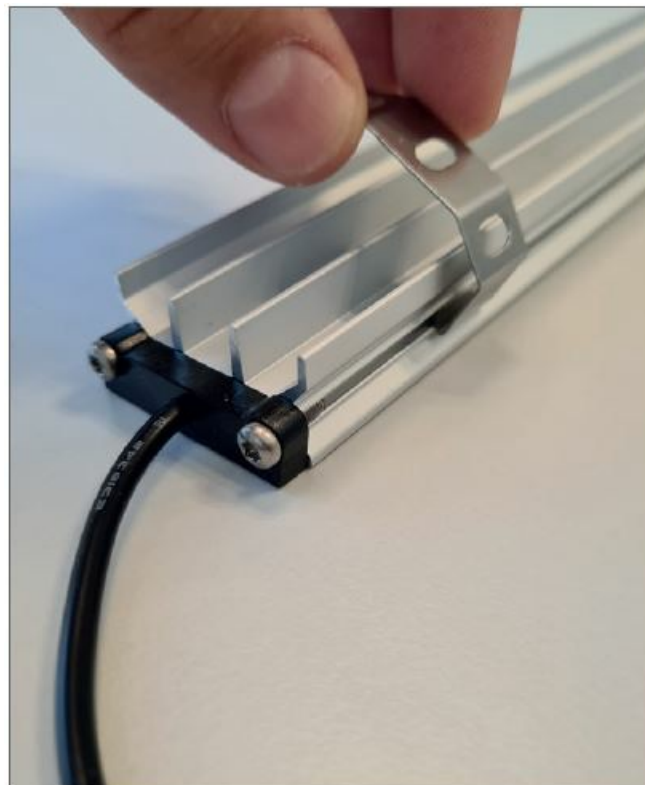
Spread the suspension bracket slightly so that it protrudes over the cooling fins on the opposite side of the FLEX II.
